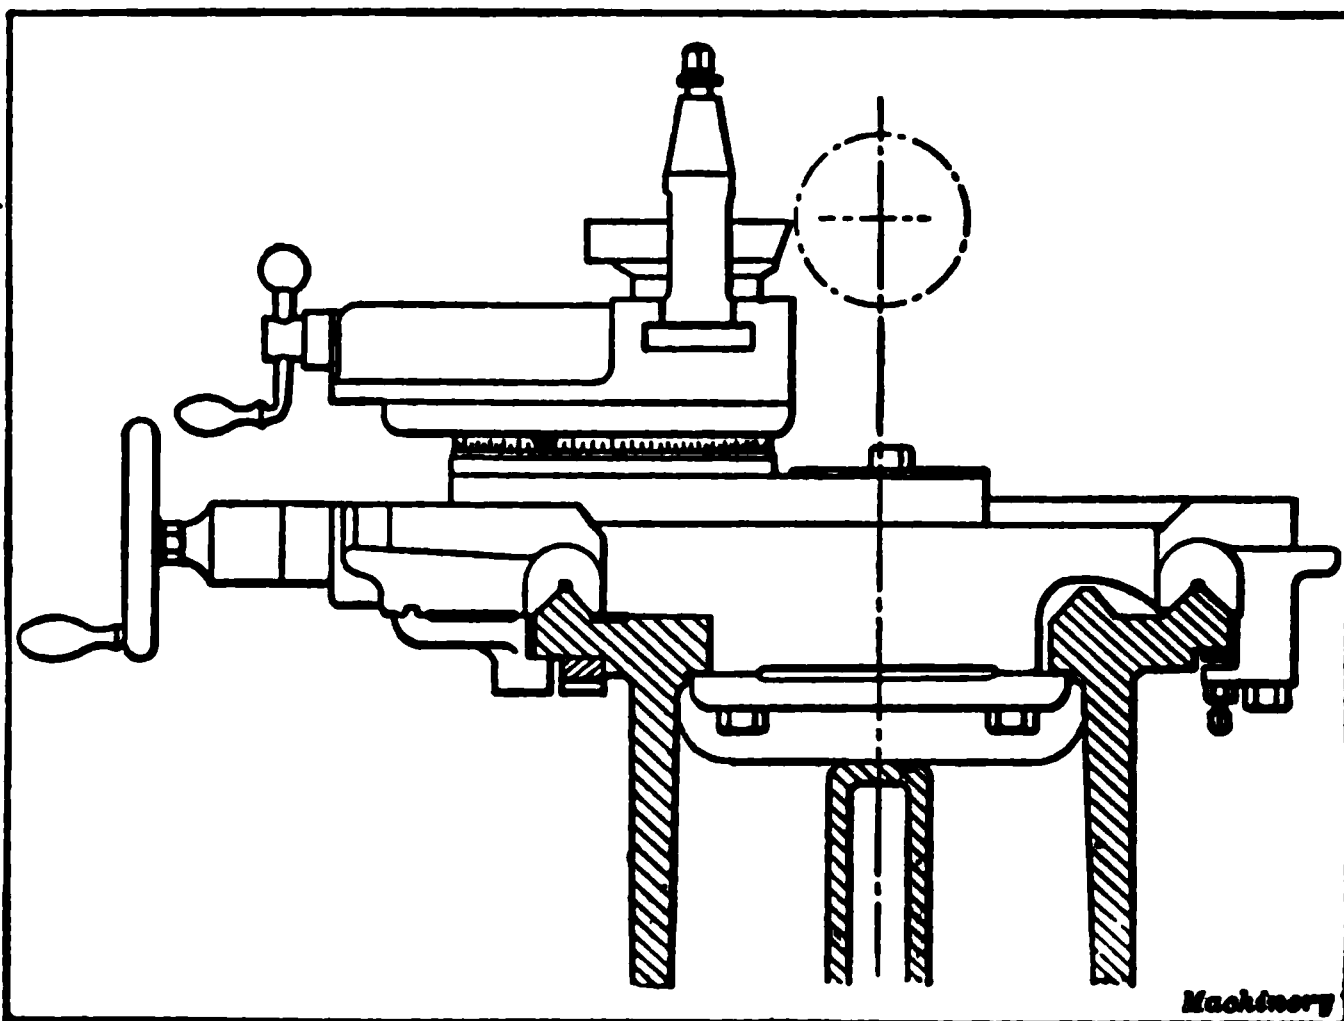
The Lodge & Shipley Machine Tool Co.'s Lathe Bed with Supplementary Bearing Surface
